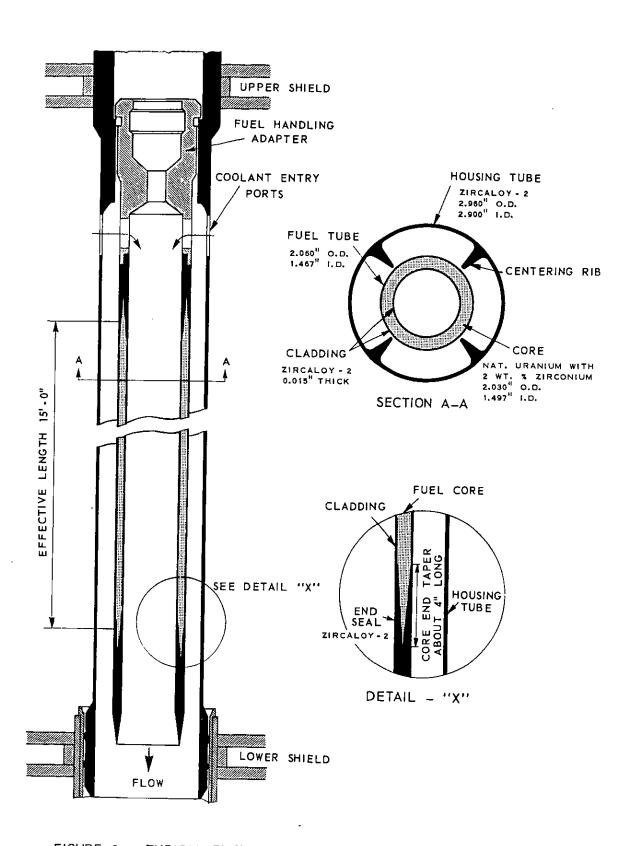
TYPICAL FUEL ELEMENT AND HOUSING TUBE SECTION
